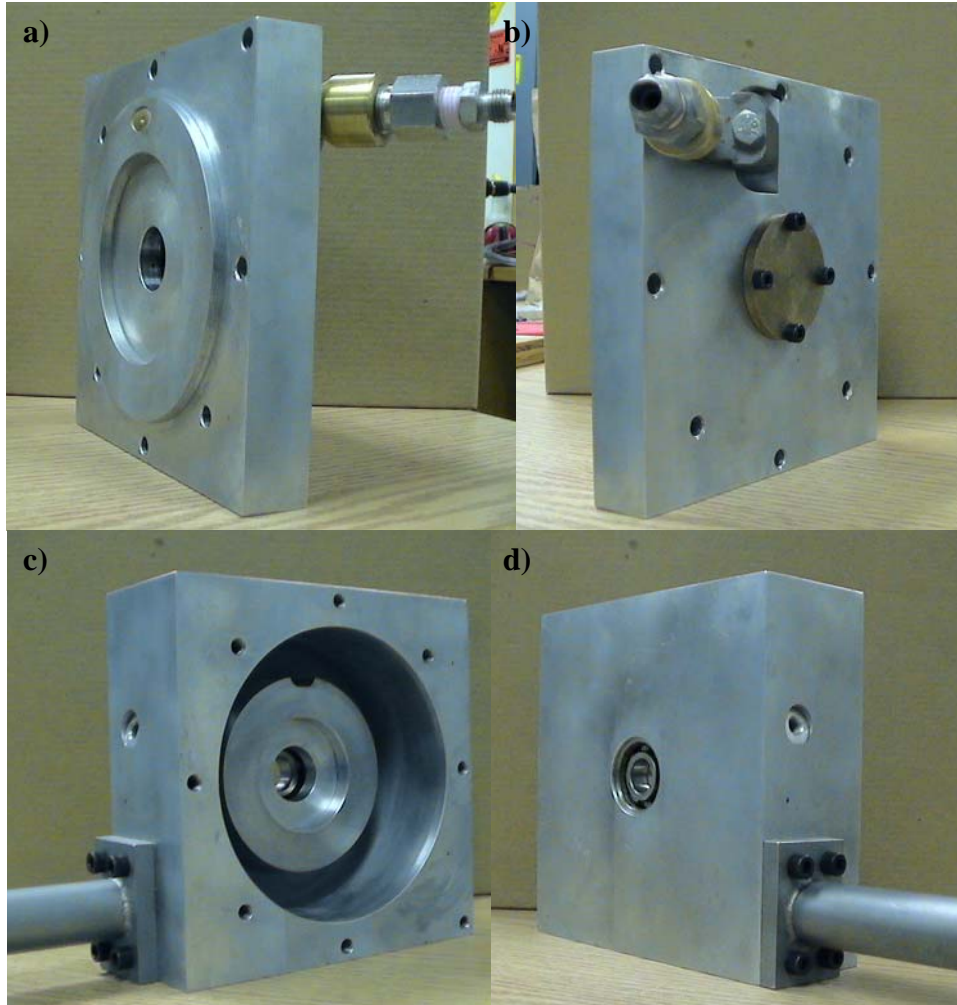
T-500 Steam Turbine Housing. a) Right housing plate, inside view, b) Right housing plate, outside view, c) Left housing body, inside view, d) Left housing body, outside view.
